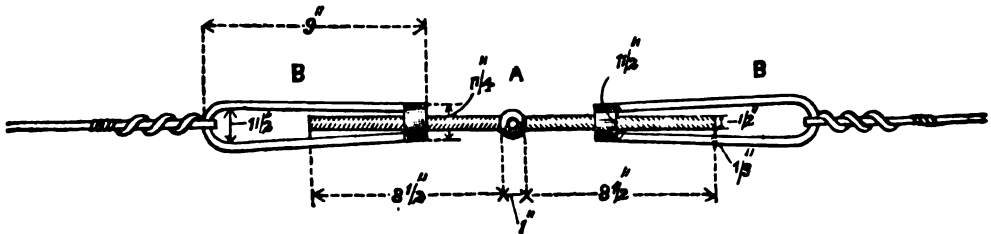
shows a contrivance for tightening iron wire. A is a rod upon which the thread of a screw is cut; the thread is cut in opposite directions, on either side of the centre of the rod. The rod A works in two loops B B, to which the wire to be stretched is fastened. The loops are brought nearer to each other by turning round the rod A by means of an iron bar placed in the hole in the centre of the rod. (Scale = $\frac{1}{4}$.)
